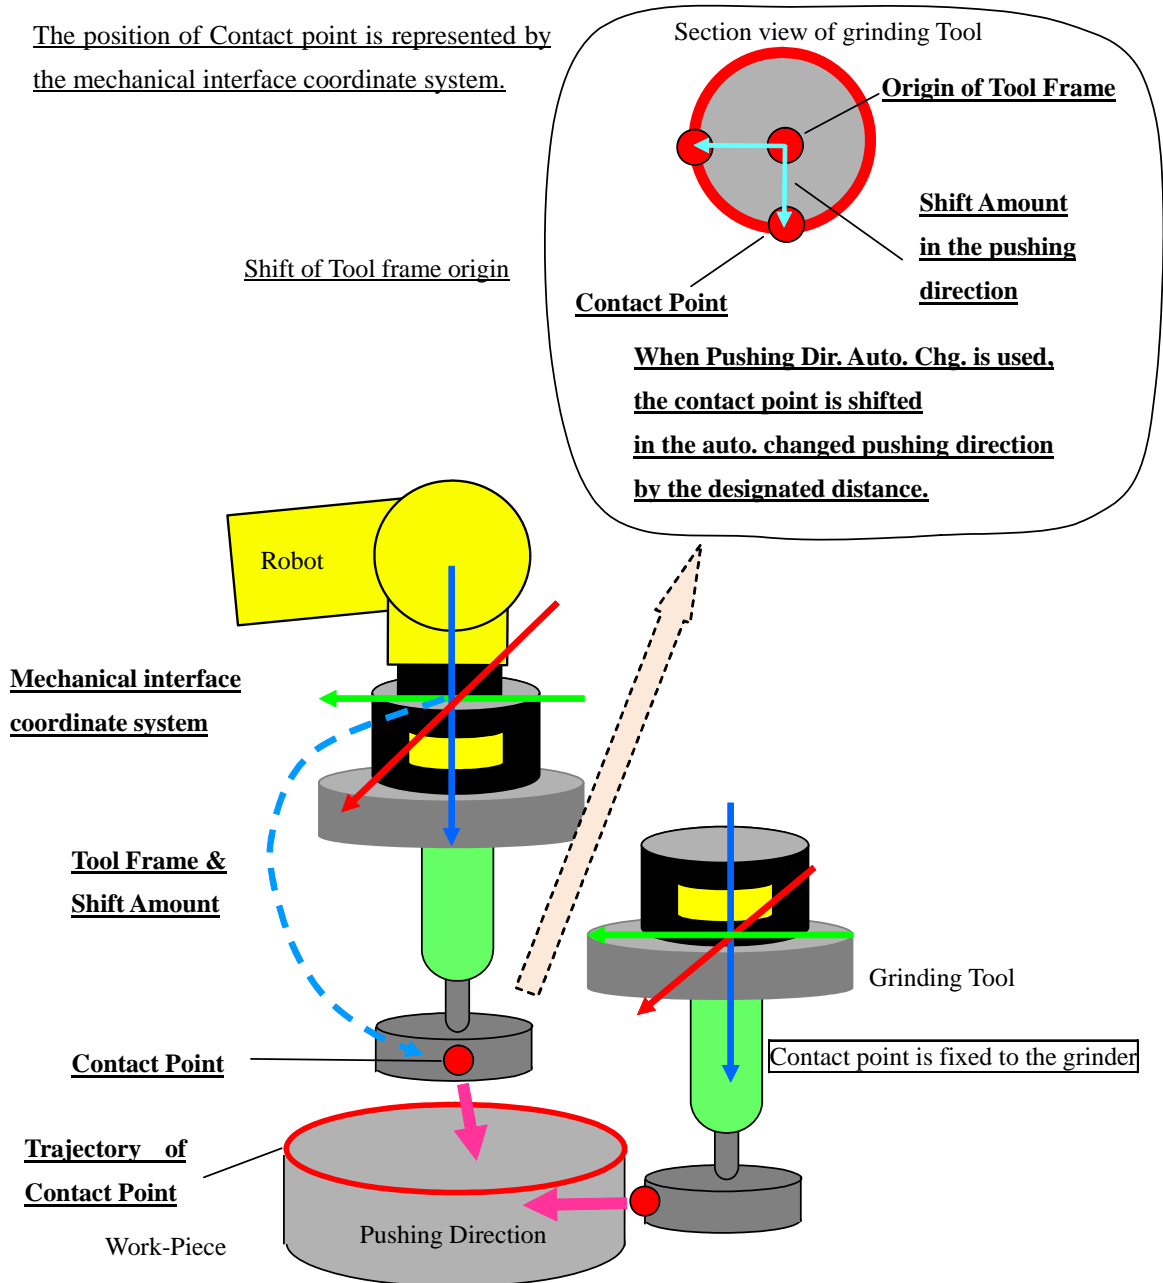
(g) Example 3 of setting TOOL to "3-Axis FS ContactP. Position"
